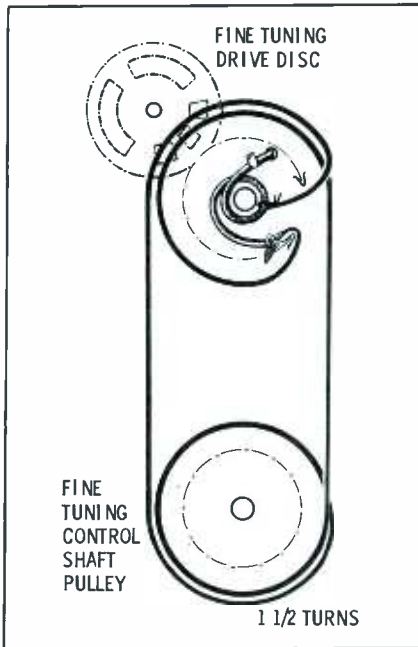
Stringing guide for fine-tuning drive cord used on Motorola tuner.
